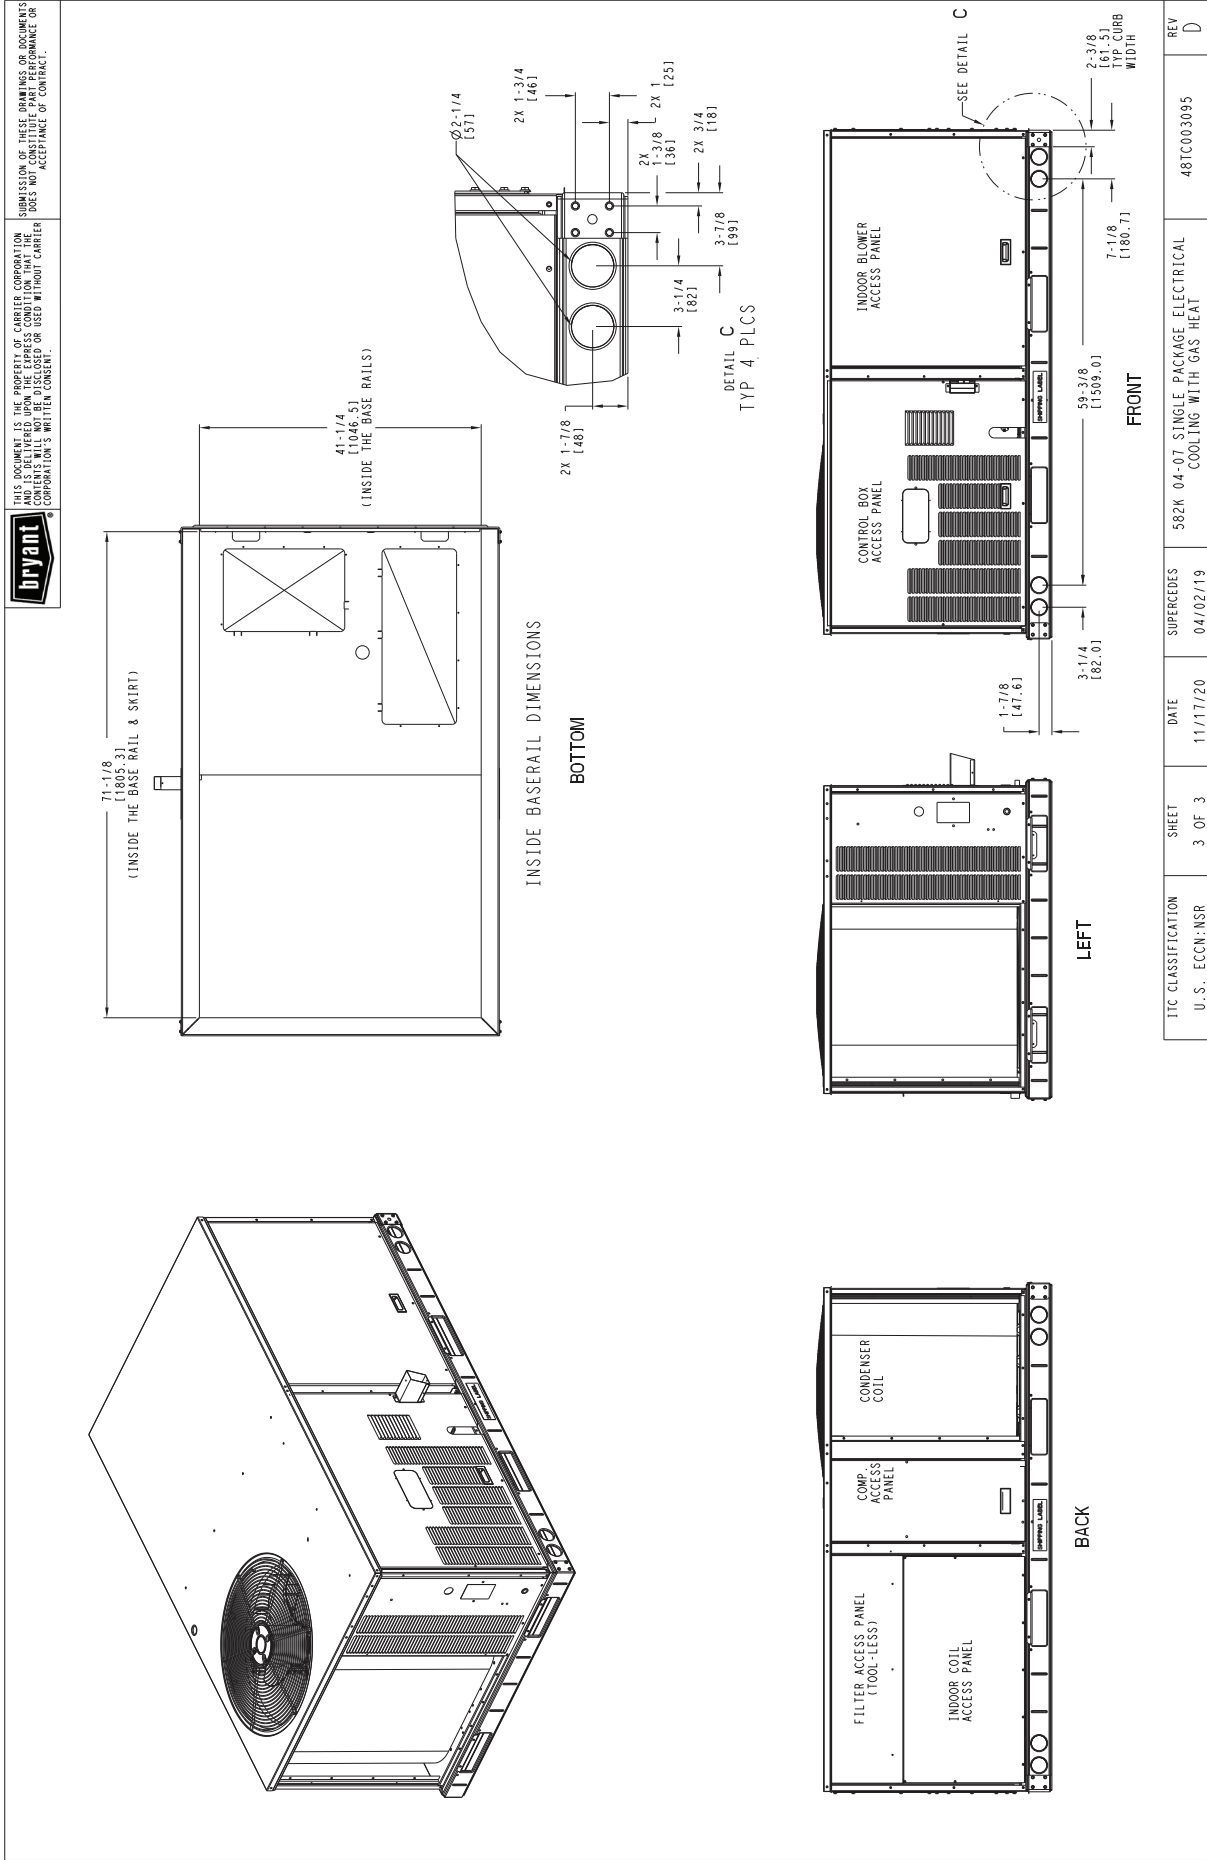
582K04-07 Dimensional Drawing (cont)
